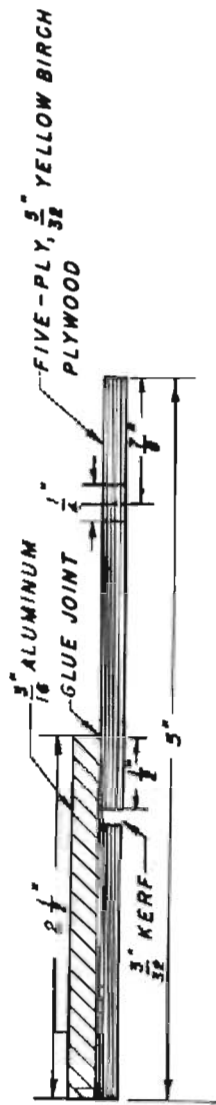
Glued wood-to-metal specimen for fatigue testing.
